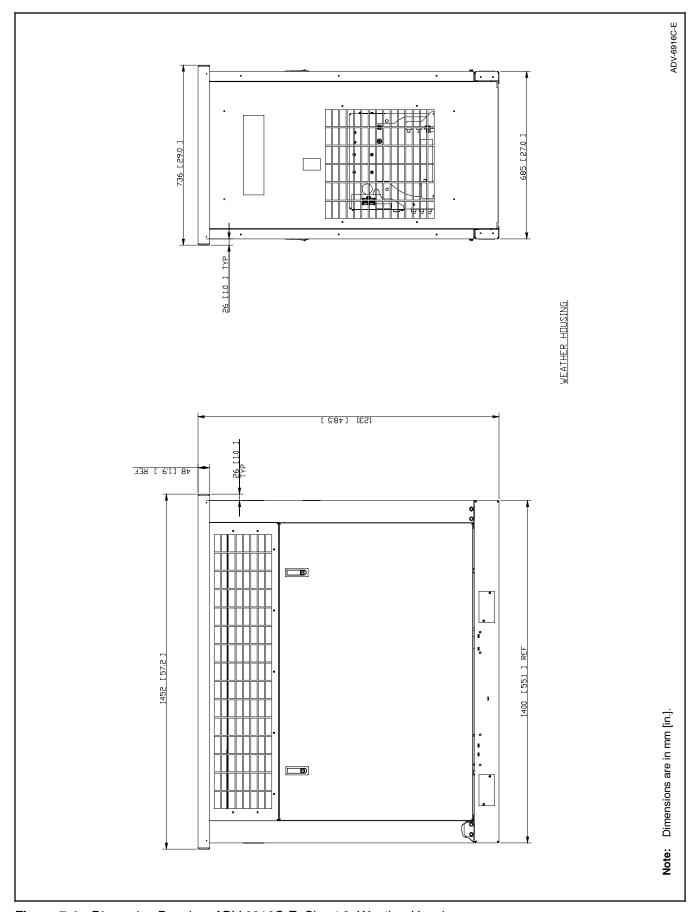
Dimension Drawing, ADV-6916C-E, Sheet 3, Weather Housing
